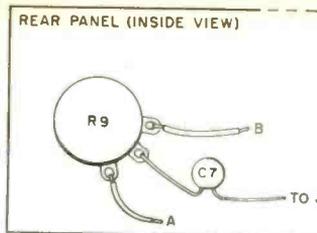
Before mounting the COMPLY printed circuit board, attach the two controls, R1 and R9, to the front and rear panels, respectively. Capacitor C7 is then soldered in place from R9 to J2.
